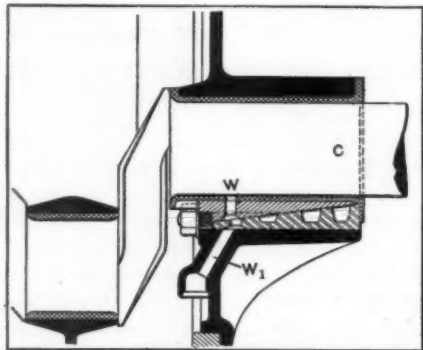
Section of a crankcase through the main bearing at one end, showing how the oil passes from the bearing to an oilway and then to a sump in the lower half of the crankcase
